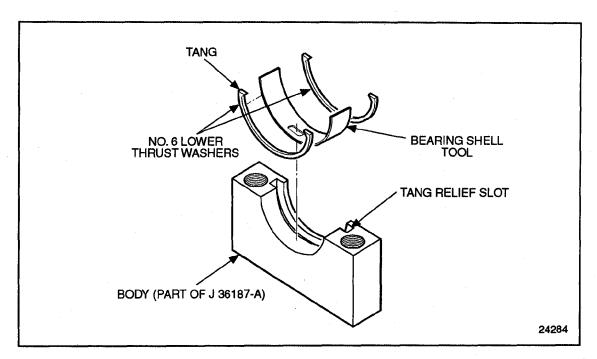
Upper Main Bearing Shell Removal-Tool Set-Up
